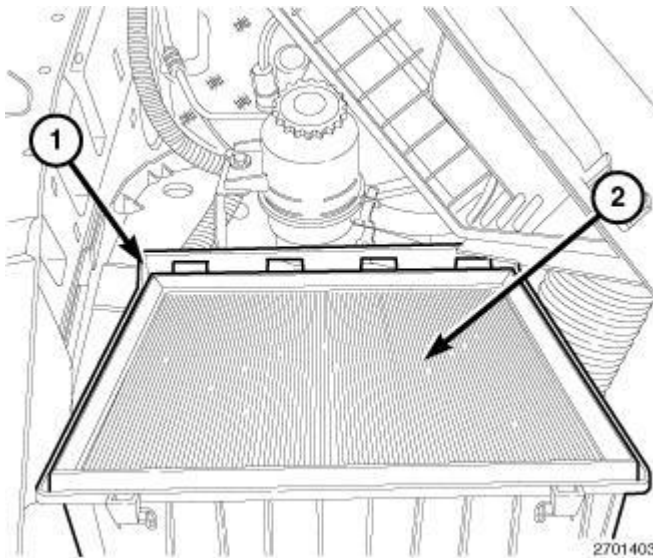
AIR CLEANER HOUSING & AIR CLEANER FILTER
